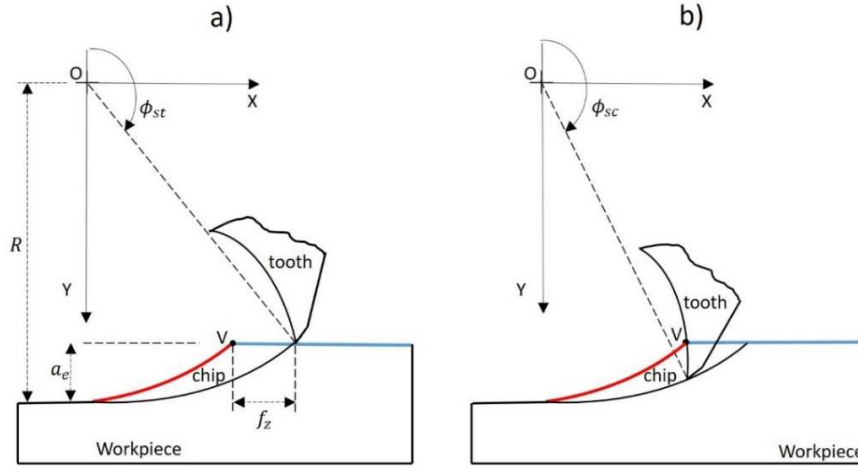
Down milling geometry, a) tool contact with unmachined zone, b) tool contact with the machined zone
